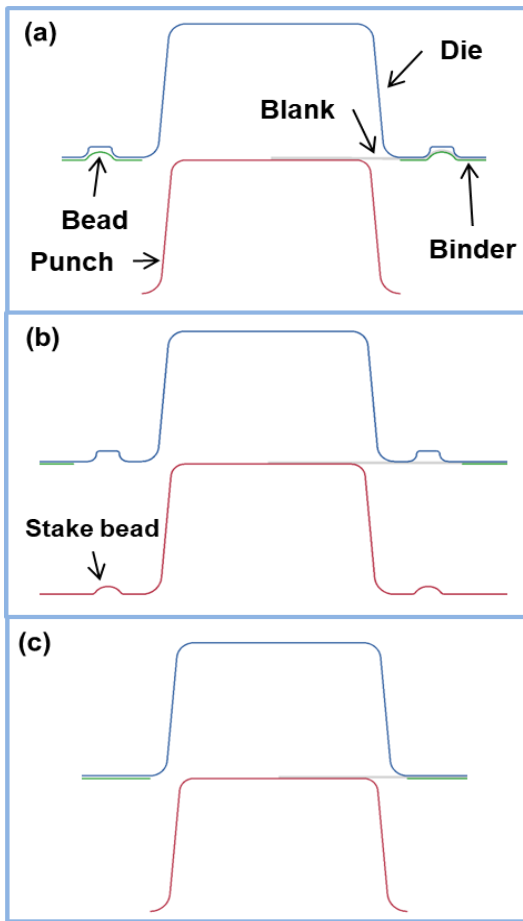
Schematic diagram of (a) draw type forming, (b) stake bead type forming, and (c) form type forming process for hat-shaped member
